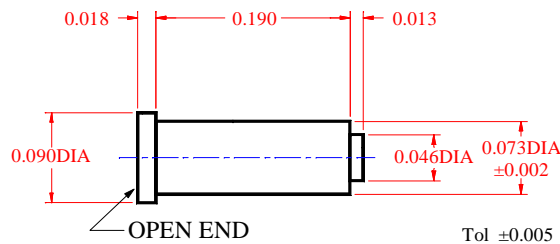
RO Socket # 9890/ 9890LF Mechanical Dimensions
